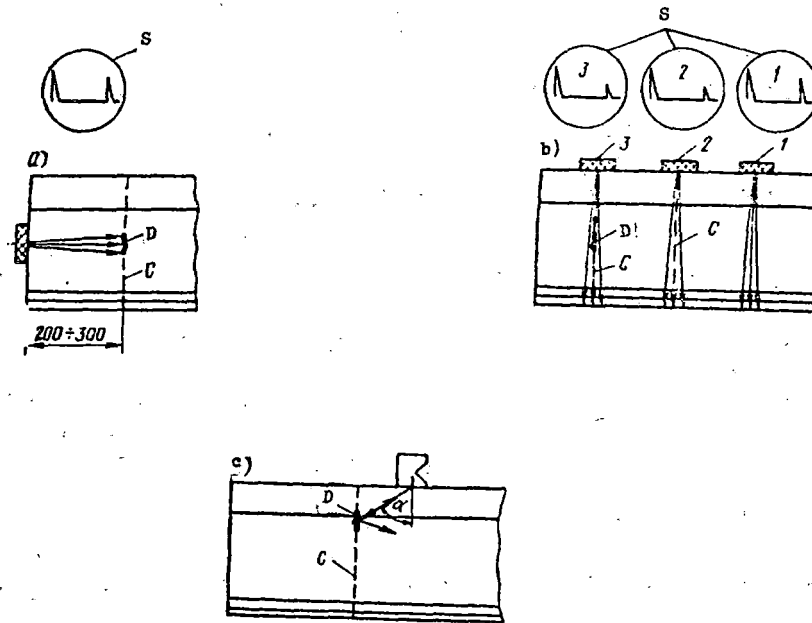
Diagram for passing sound waves through the welded joint C using probes a, b -- normal; c - angle
